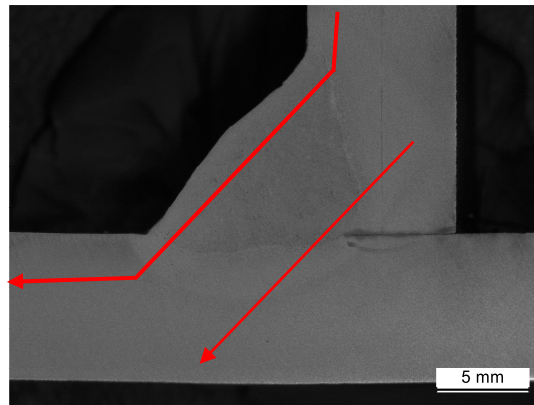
Hardness test of the 8mm fillet weld sample
